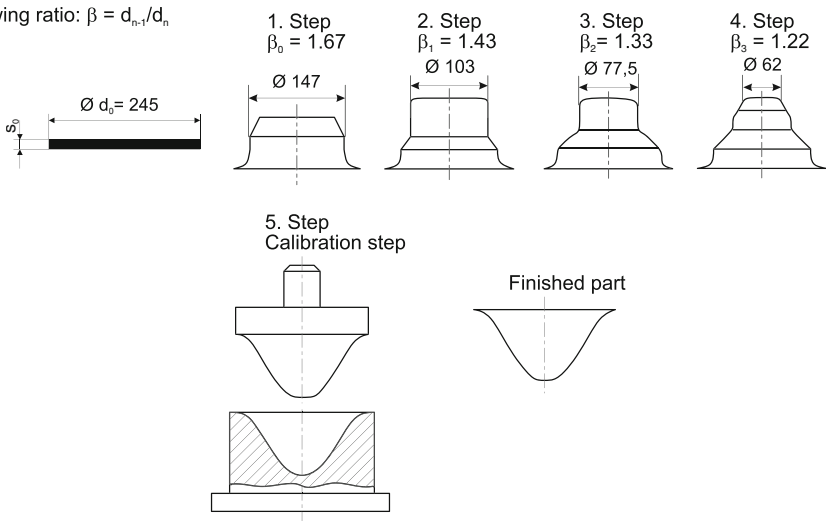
Deep drawing of a conical workpiece with cylindrical intermediary draws
